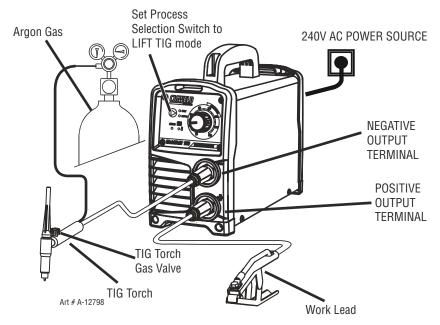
Setup For Lift TIG (GTAW) Welding
